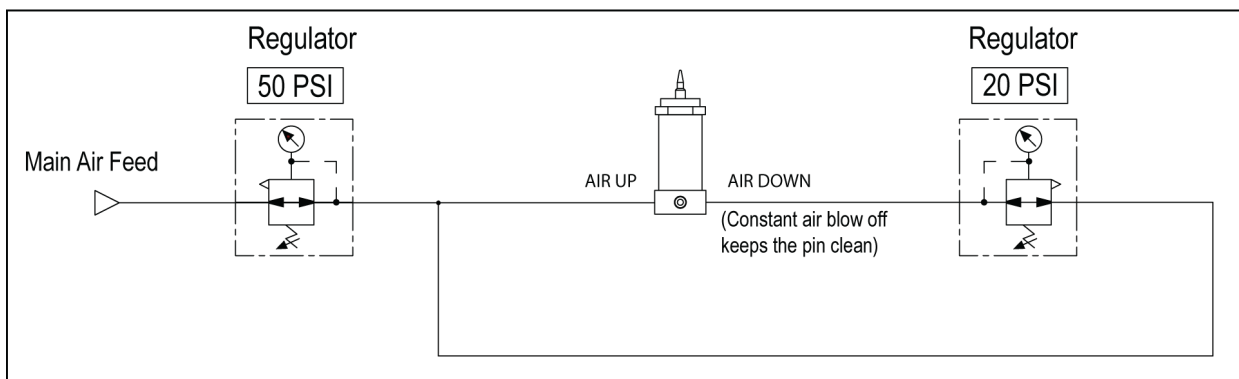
Pneumatic Connection Diagram for LVDT Weld Body with Non-Retractable Pin (Not applicable to Clamp Mount Assembly)
